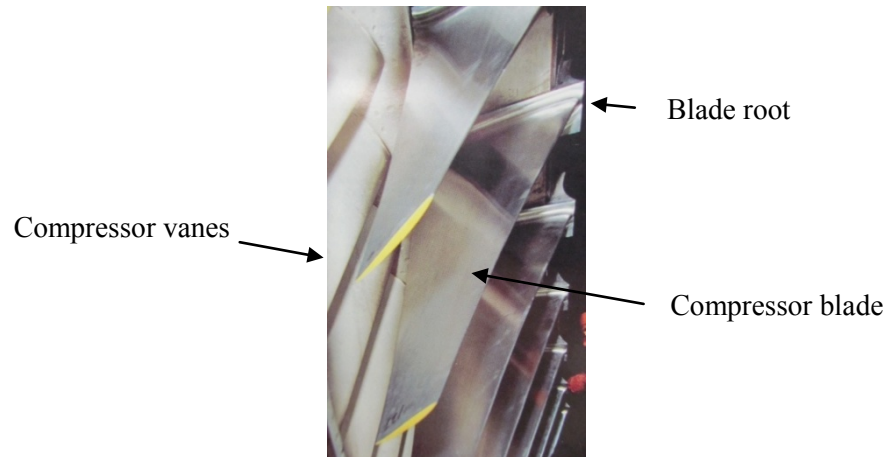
Unitary Plan Wind Tunnel Compressor Blade
